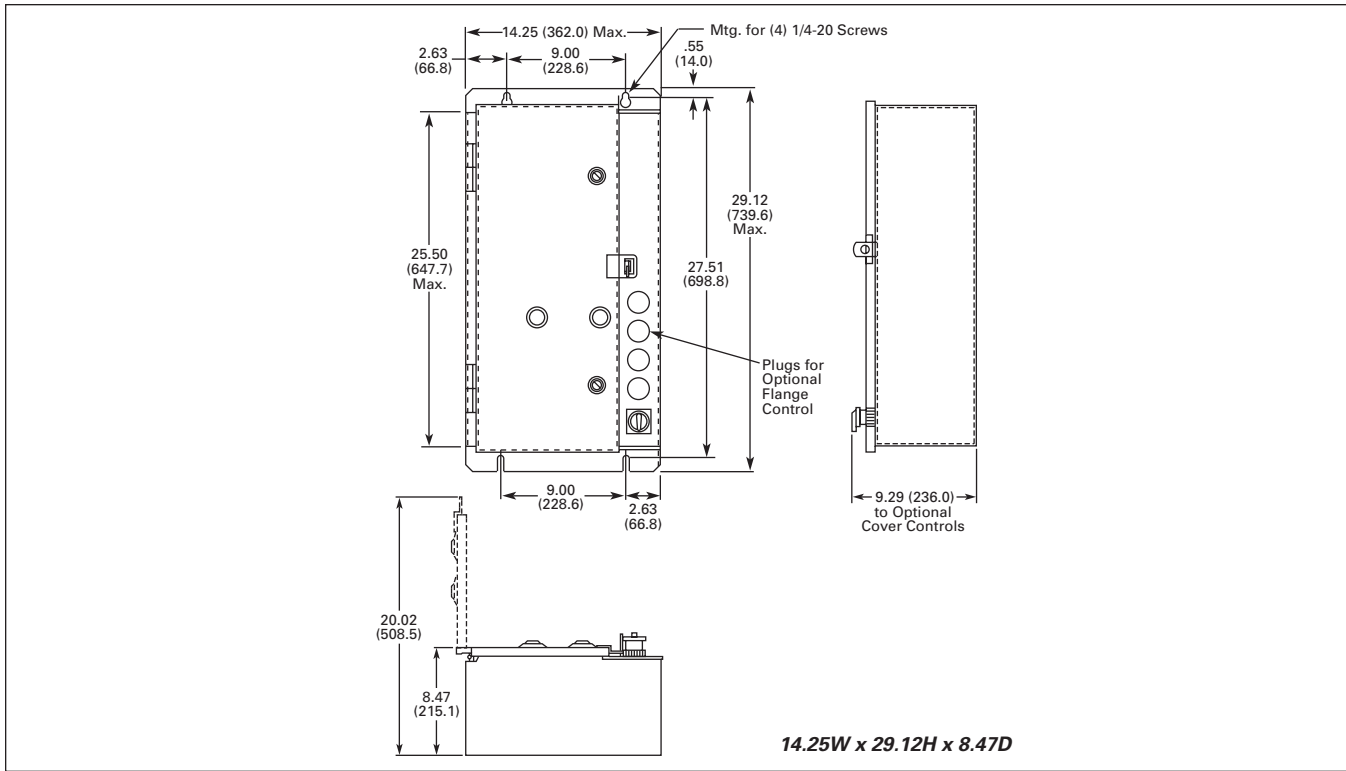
Box 8, Type 12 — Approximate Dimensions in Inches (mm)
